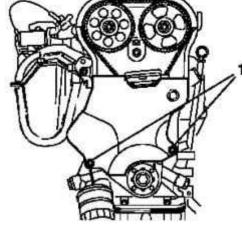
Removing the snubber and the bottom of the cover toothed belt: 1 - bolts fastening
